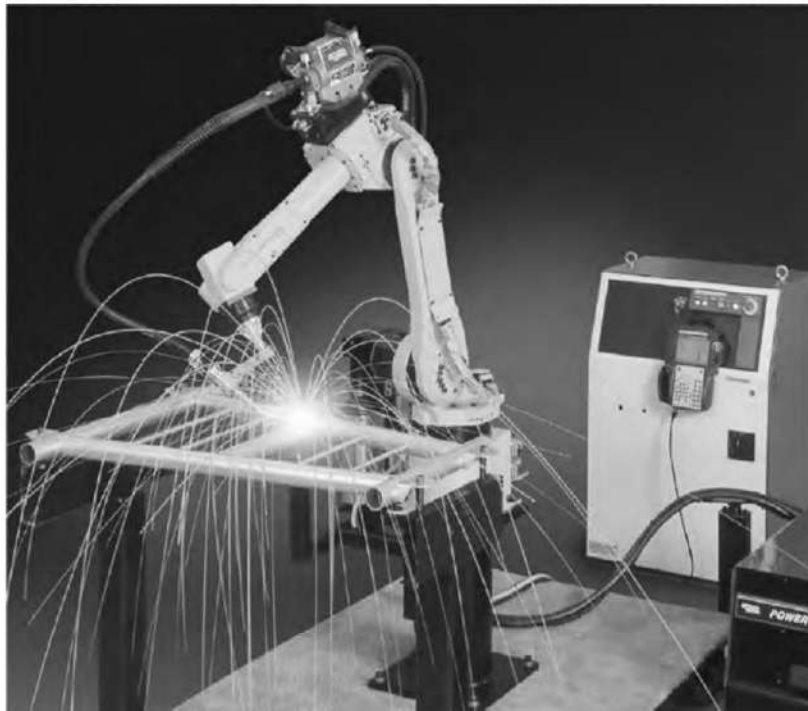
Arc-welding robot in operation (Courtesy, Fanuc)
